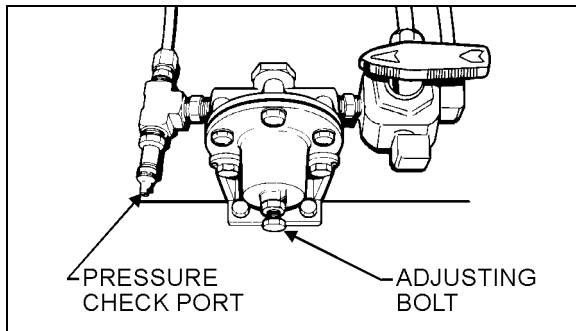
AIR PRESSURE REGULATING VALVE 12036
